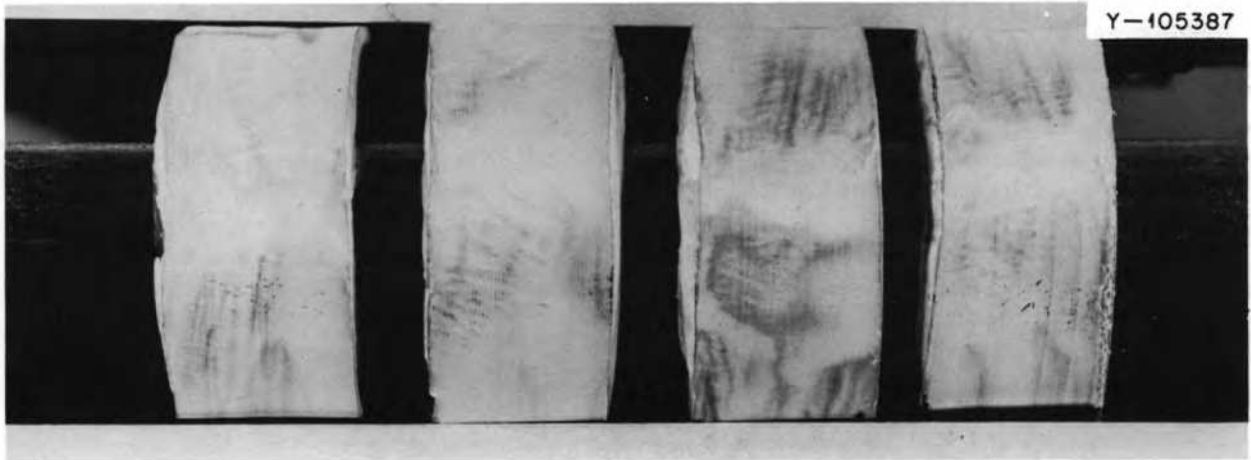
Plate of 69-345 that cracked during welding. The plate was  $\frac{1}{2}$  in. thick and was being welded with filler metal from the same heat.
